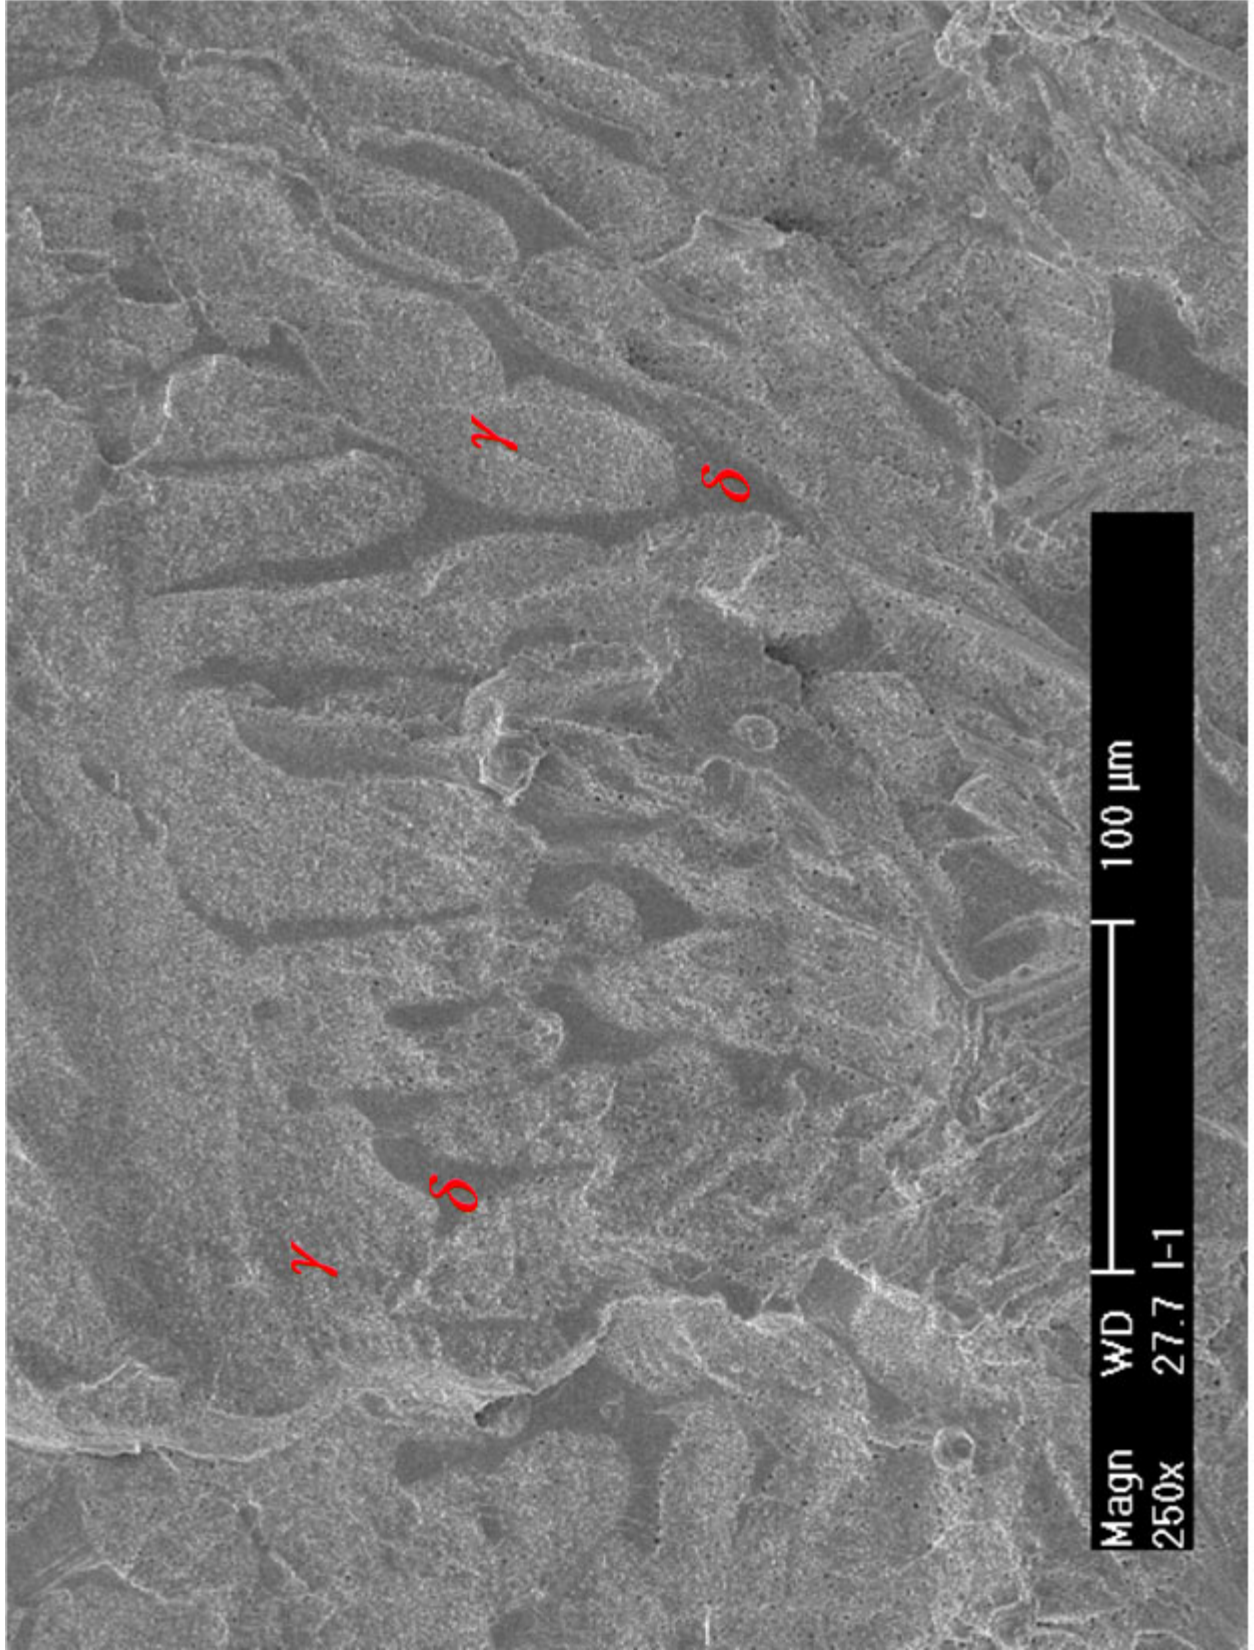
Fracture surface at the end of CGR test of specimen I-1. Crack propagation from bottom to top.
